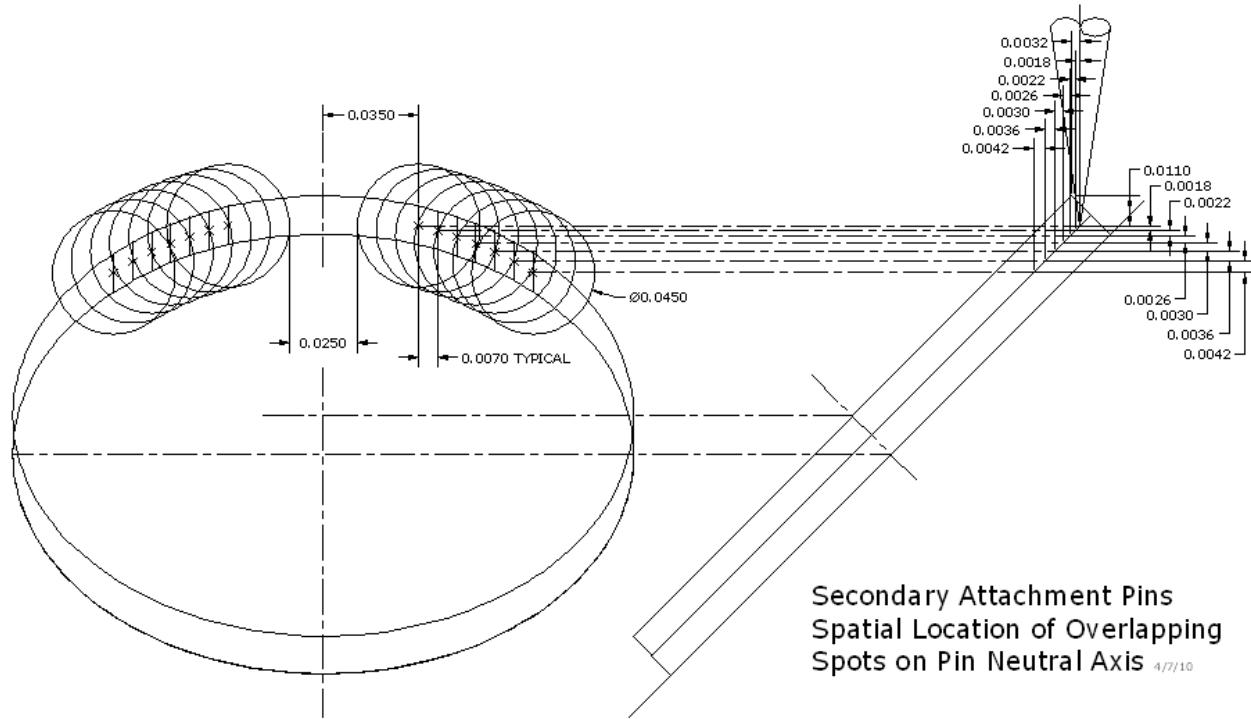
Placement of Spot Welds on Secondary Attachment Pins
